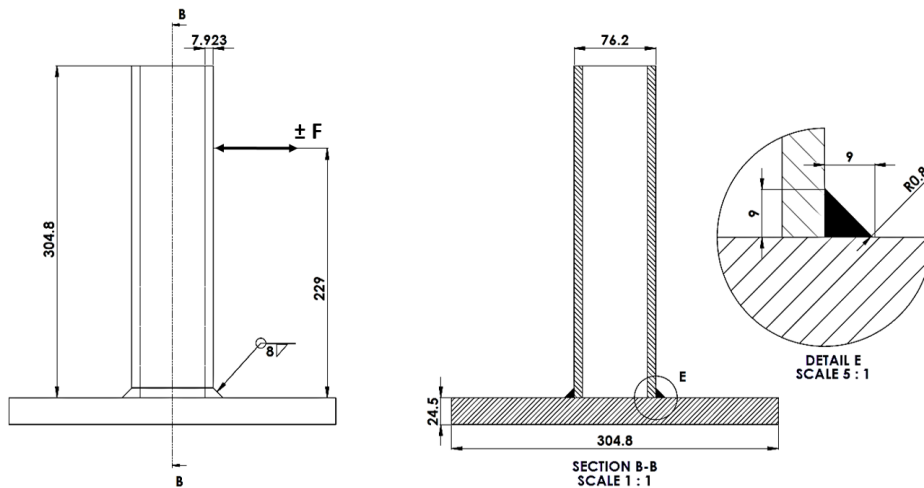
1: Dimensions and loading direction of the Square-Tube-on-plate welded joint subjected to lateral loading (all dimensions in mm)
